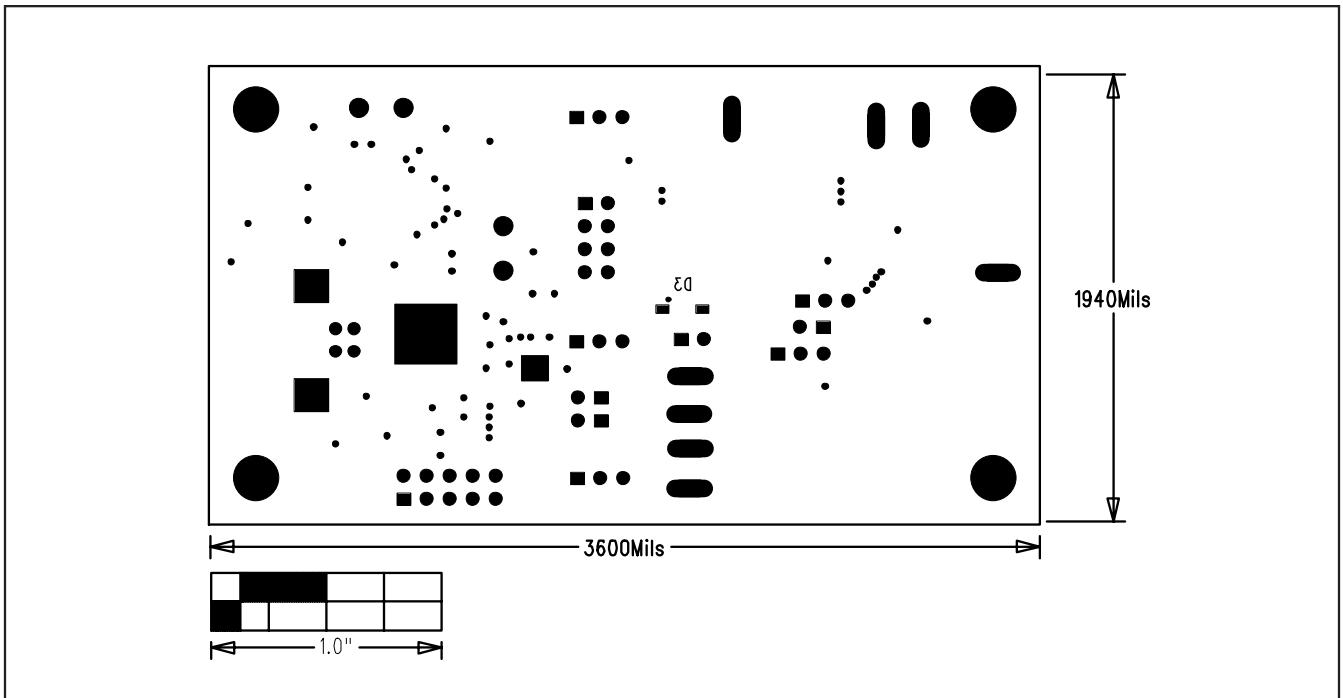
MAX8834Y EV Kit Component Placement—Bottom Layer
